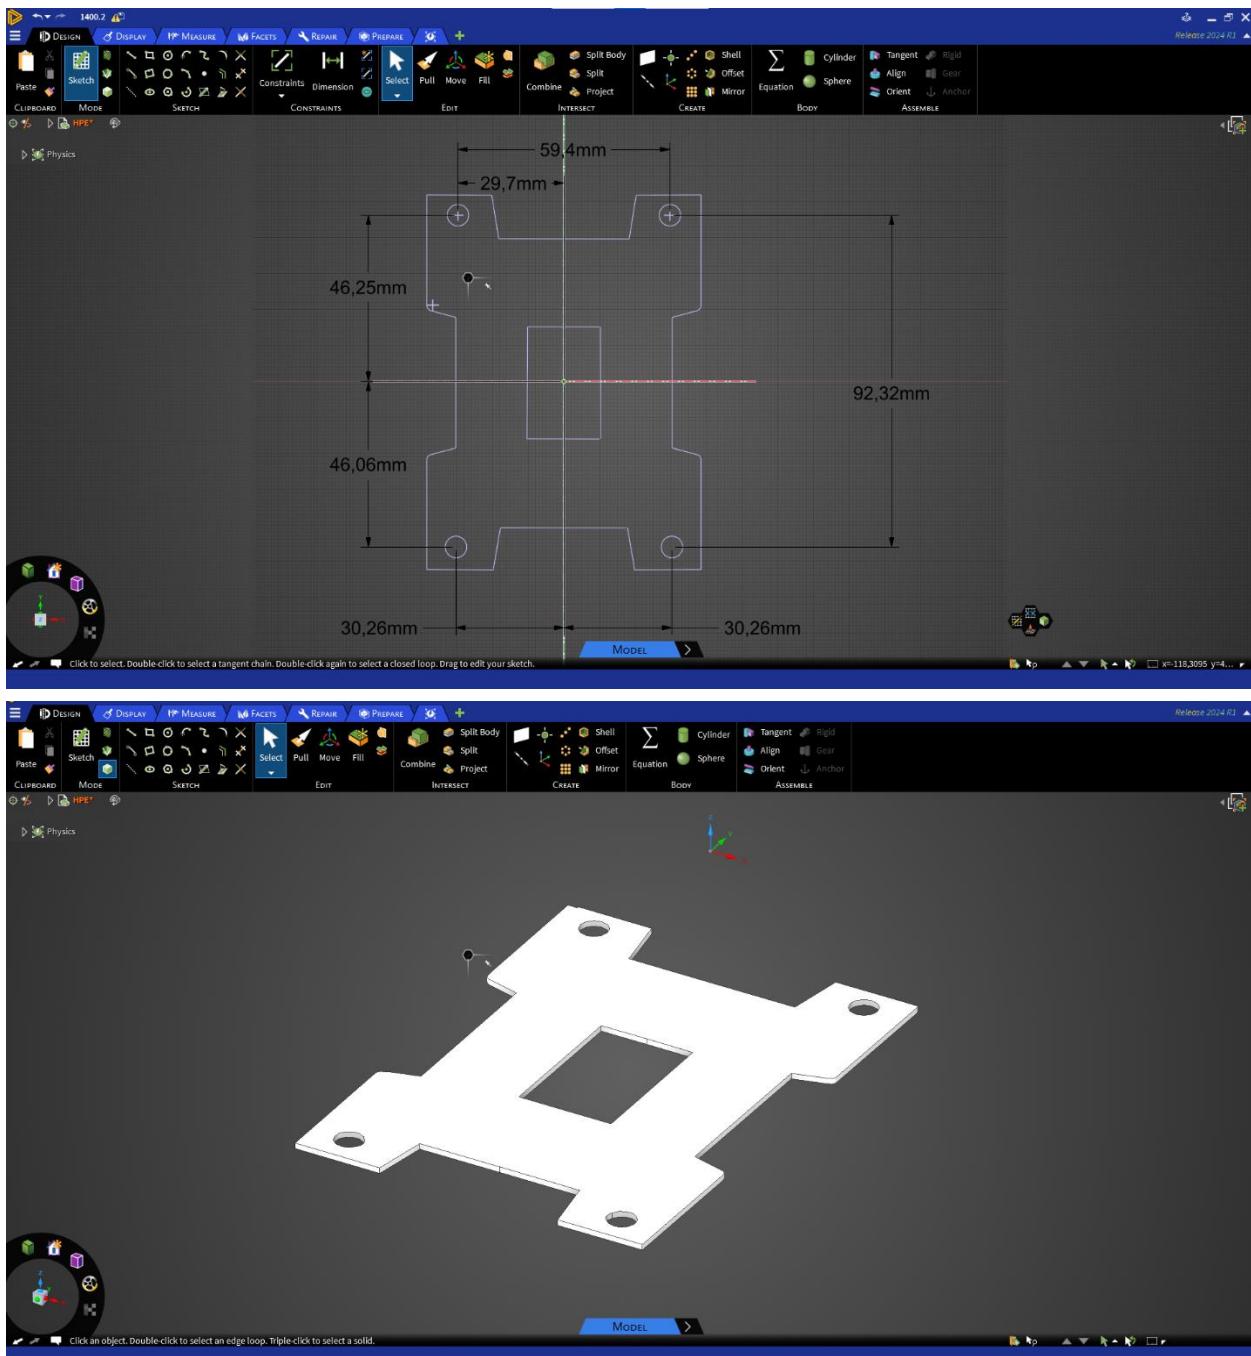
SP3 Socket Stiffener Frame - Dimensional Overview and Tolerance Specifications
